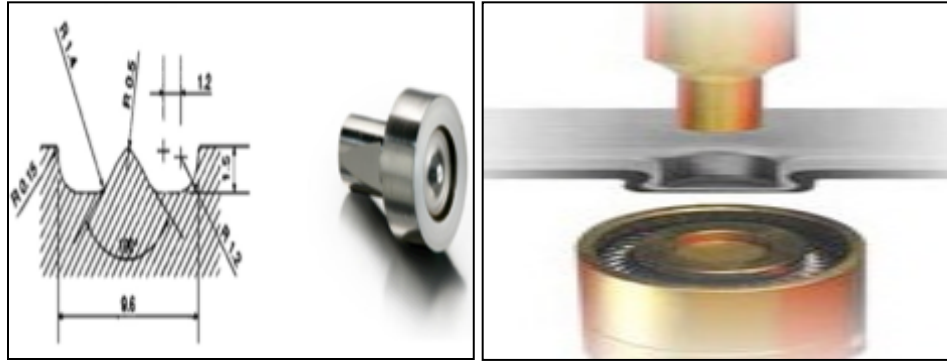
(a) Rivet spot setting tool die (b) Die used for clinching
